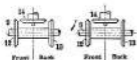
CLUTCH CONTROLLING CARRIAGE TRAVEL; AND CAMS WHICH SLIDE THE BEVEL GEARS ON THE SQUARE SHAFTS
